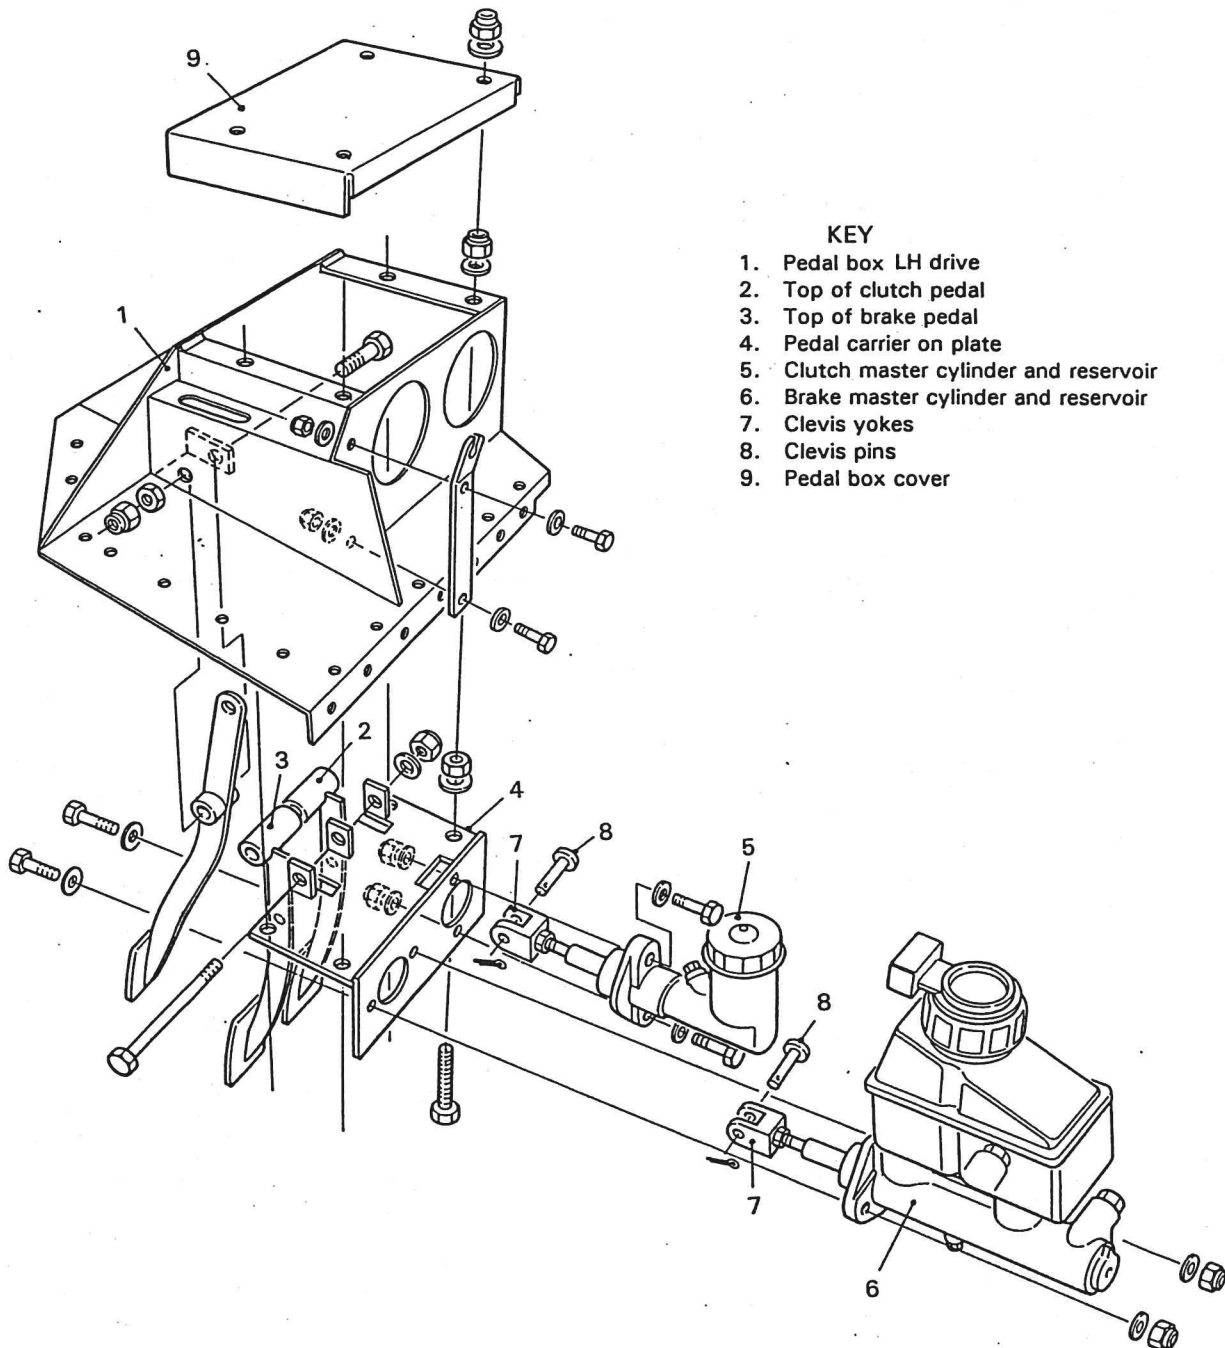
Pedal Box Showing Clutch Master Cylinder and Reservoir
